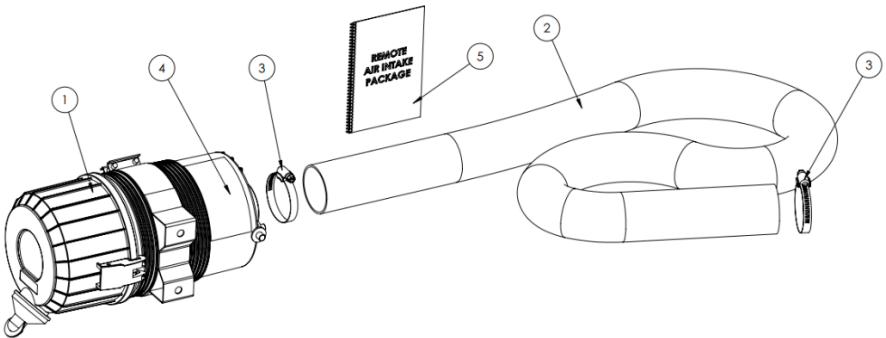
A2202## Remote Air Intake Package With Optional Elbow (A220212 shown)
